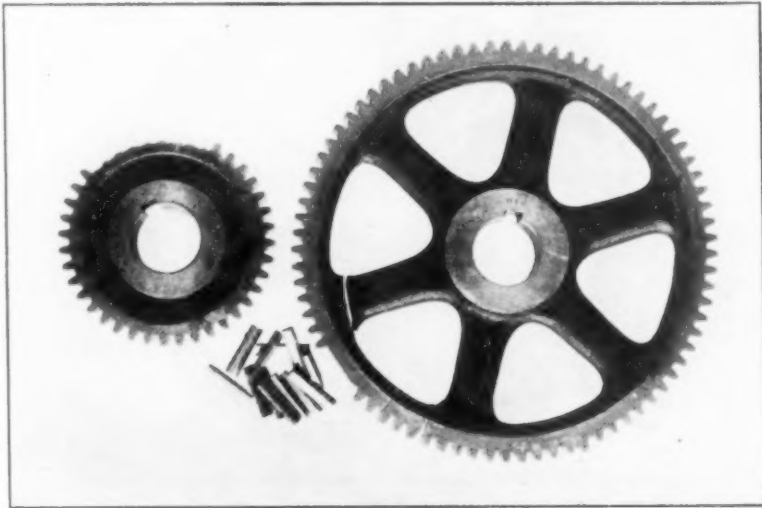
40 TOOTH ENGAGING 80 TOOTH, TEST 013, SERIES 1
